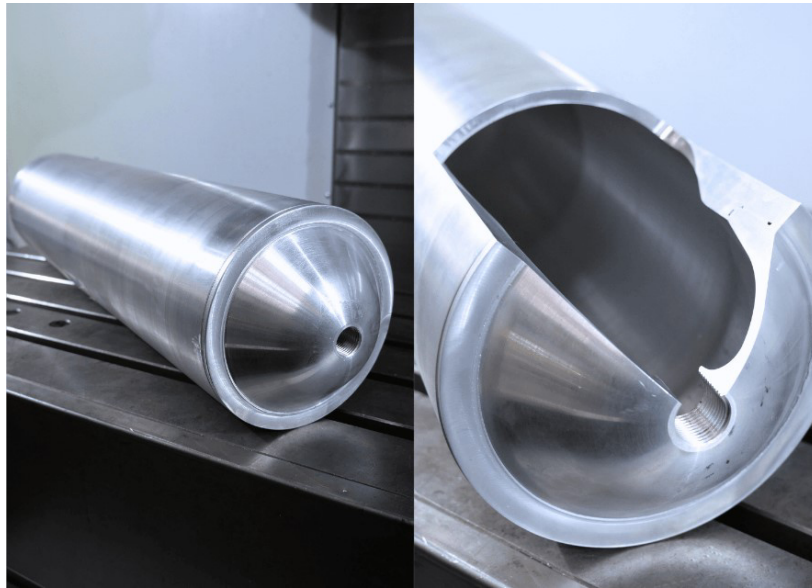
Aluminium Fuel Tank Friction Stir Lap welded [14]
